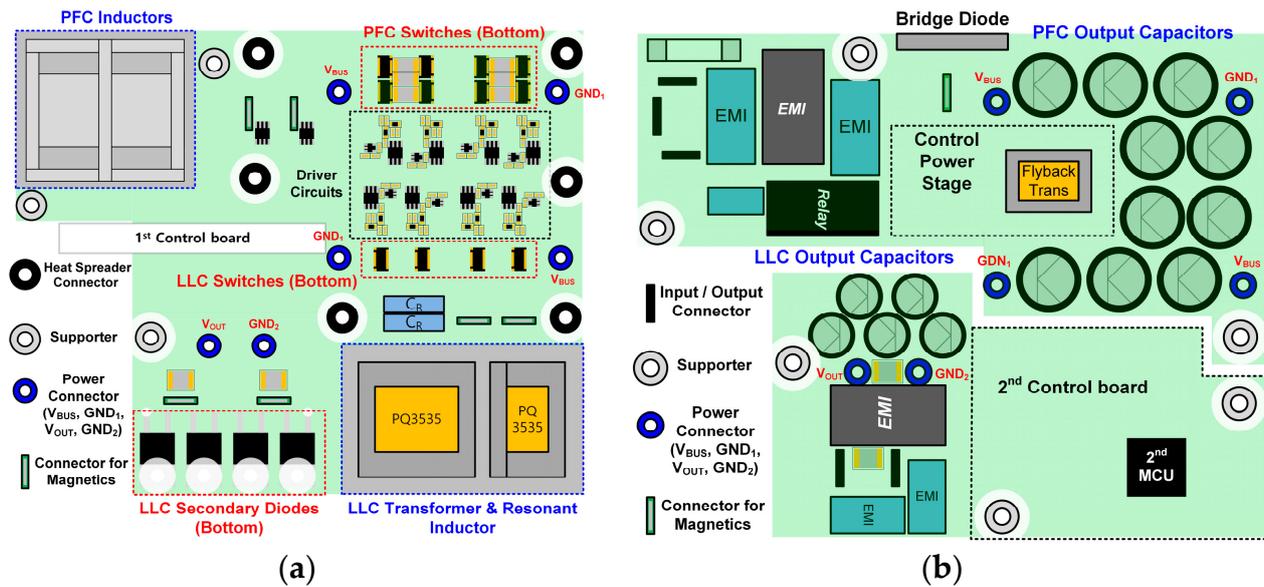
Layout of two PCBs for 3D-PCB design. (a) Bottom PCB for lossy components. (b) Top PCB for bulky components. The heat spreader is located underneath the bottom PCB to dissipate heat effectively.
